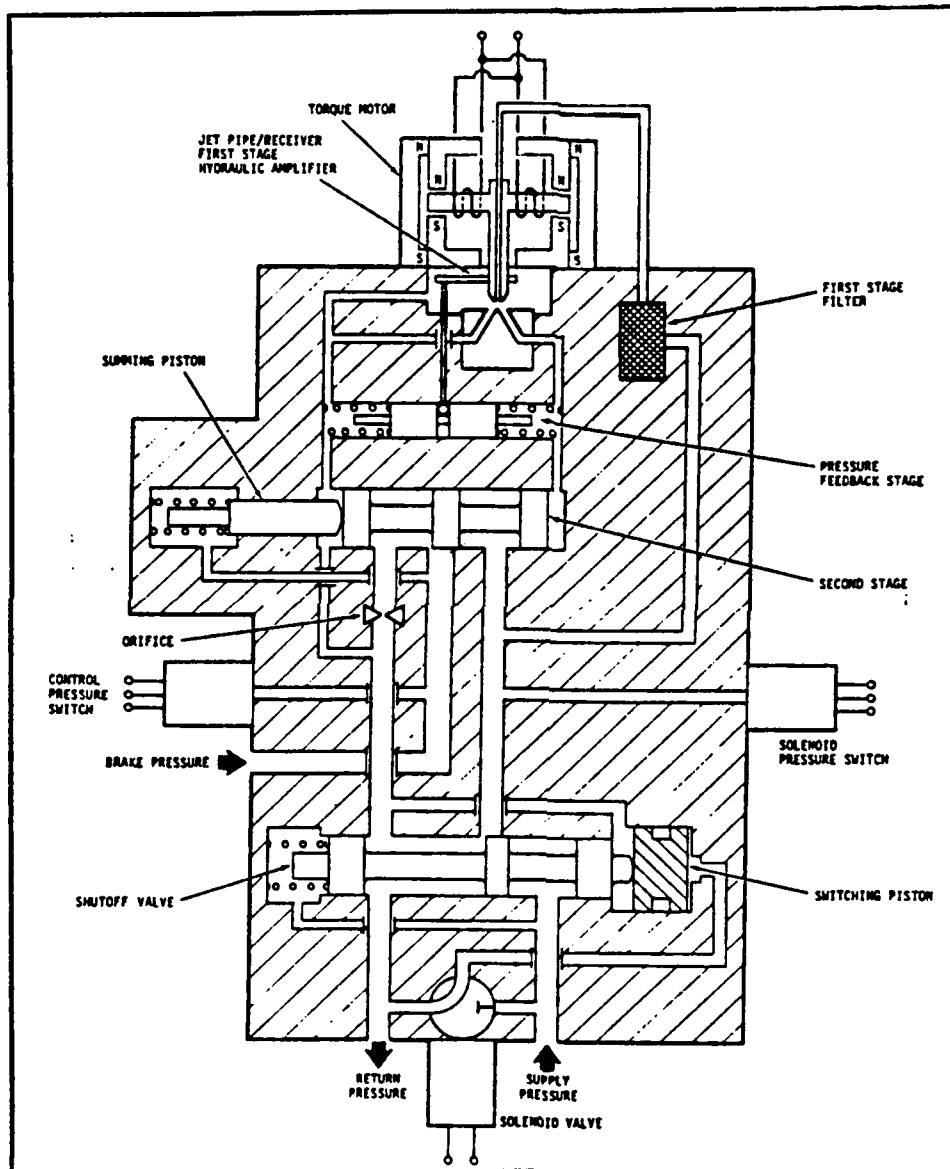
Schematic drawing of the autobrake module, Type 2.
